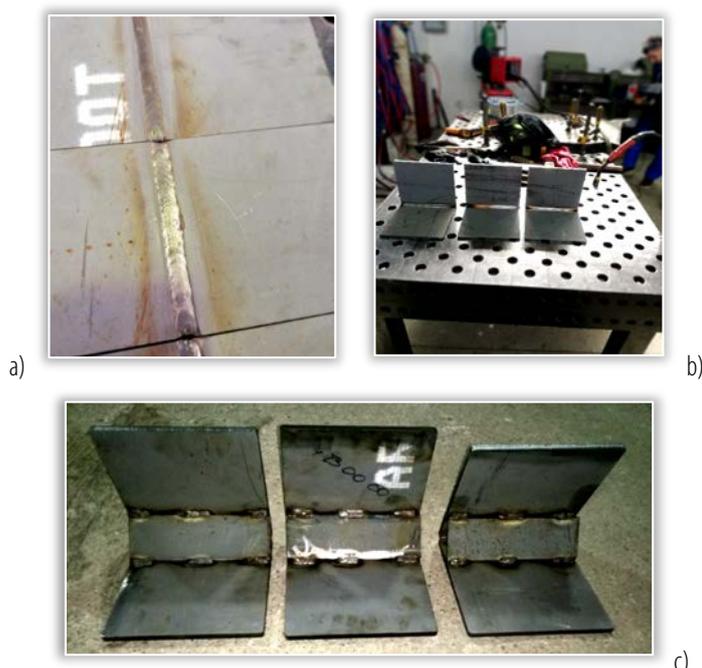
Welded plates: a) butt, b) corner and c) corner-edge joint.
